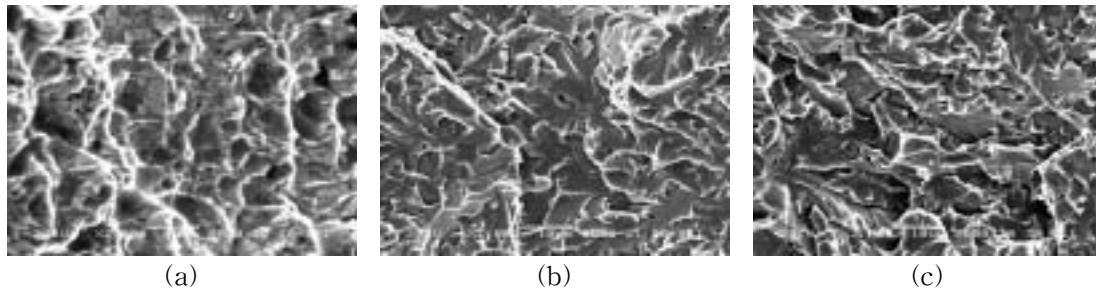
SEM fractographs of weld CVN specimens made with heat input of 5.0 kJ/mm(x2,000). (a) 20°C, (b) -90°C and (c) -190°C
